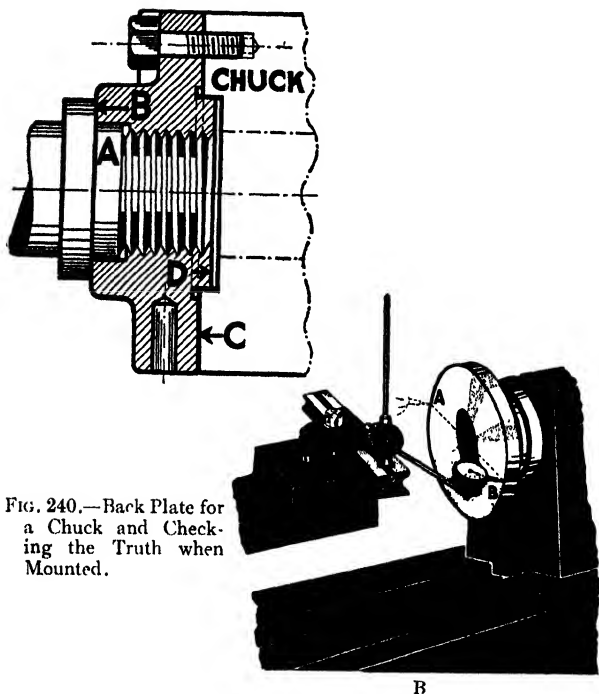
Back Plate for a Chuck and Checking the Truth when Mounted.
